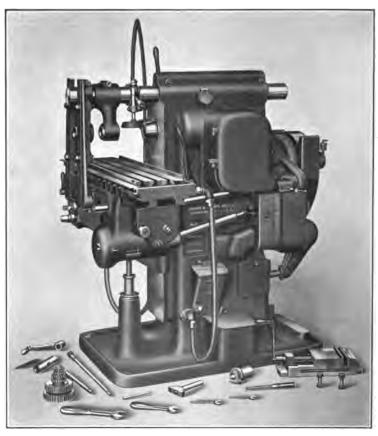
Automatic milling machine. (Courtesy Brown & Sharpe Mfg. Co.)
